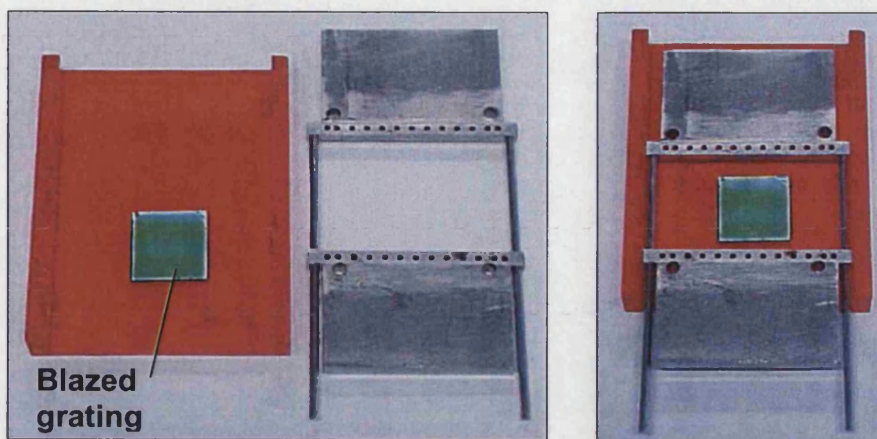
Stainless steel rig and mould containing a blazed diffraction grating.
